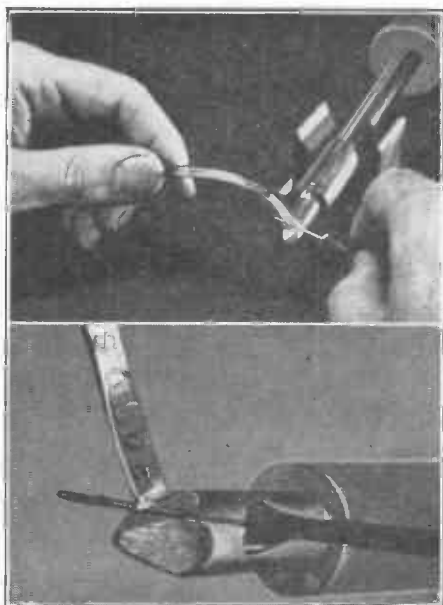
Method of holding the solder and wire when tinning either solid or stranded wire. The heated soldering iron is left in its holder. The close-up photo shows a partly tinned wire. Slide the wire back and forth between the soldering iron tip and the solder until it is completely tinned for about half an inch from the end.
